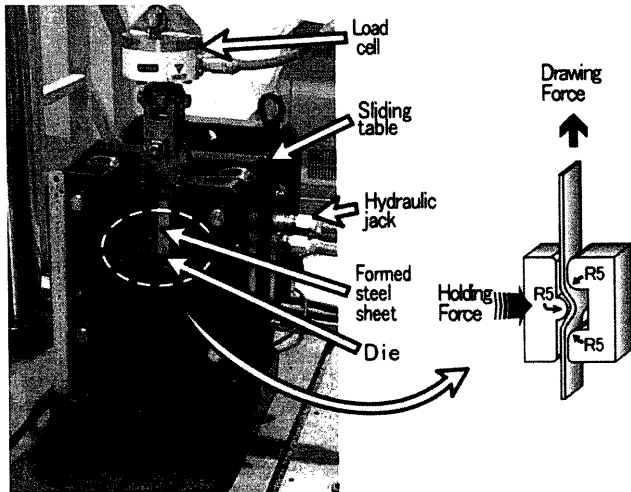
Appearance of press forming tester and schematic drawing of forming method.
